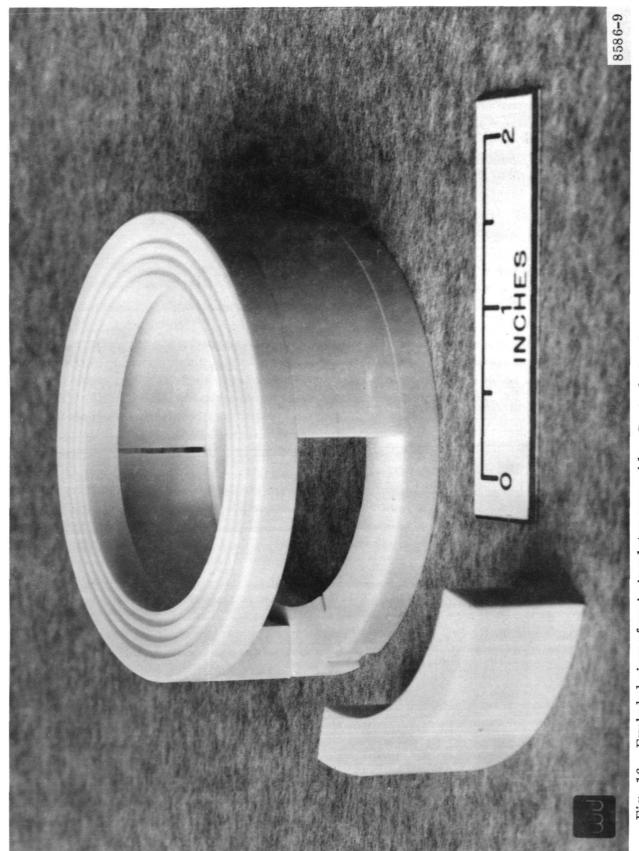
Exploded view of main insulator assembly. Central ring is segmented to allow for thermal expansion.
